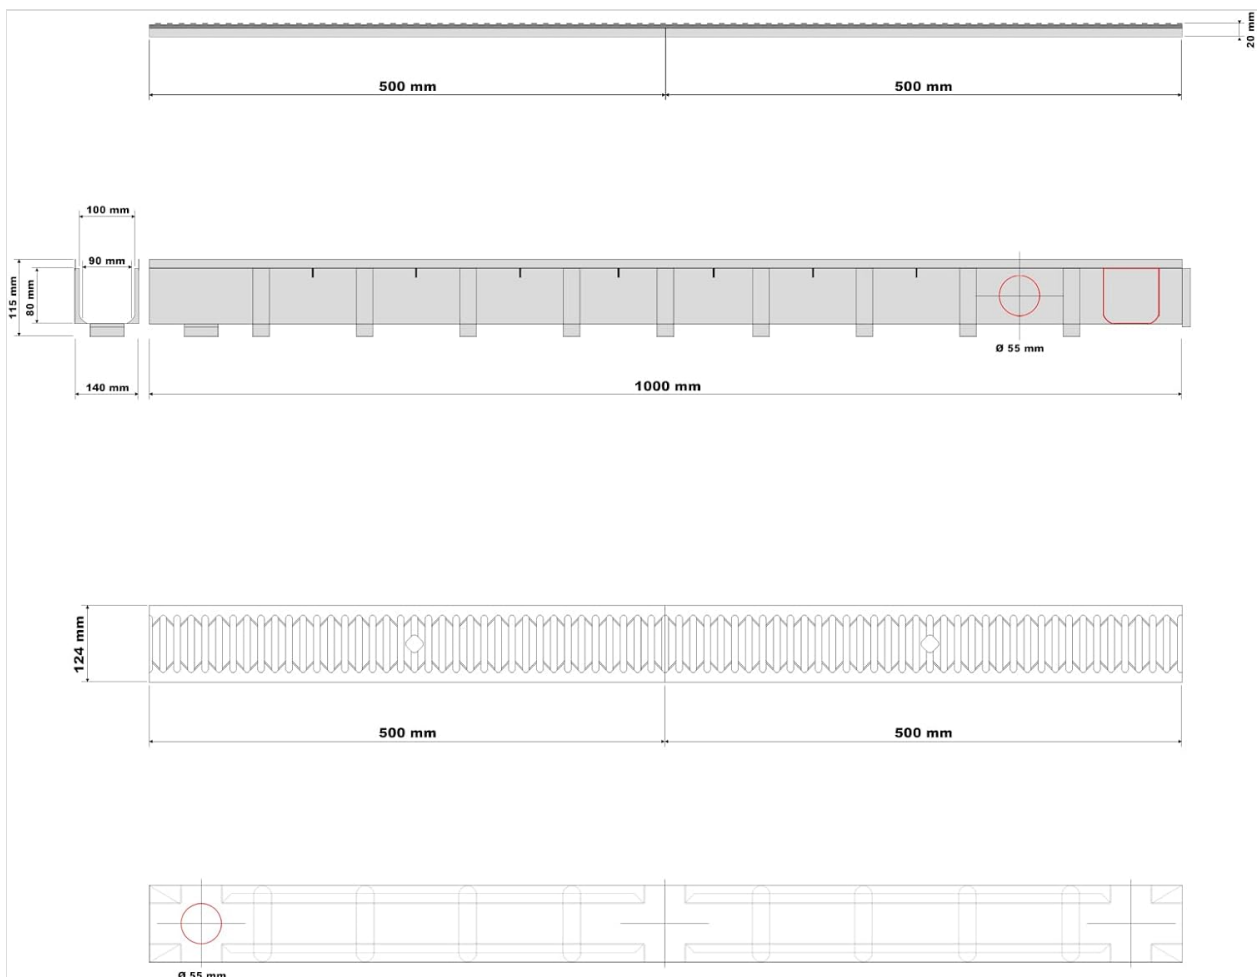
Detailed technical drawing with key dimensions of the drainage channel and grate.
